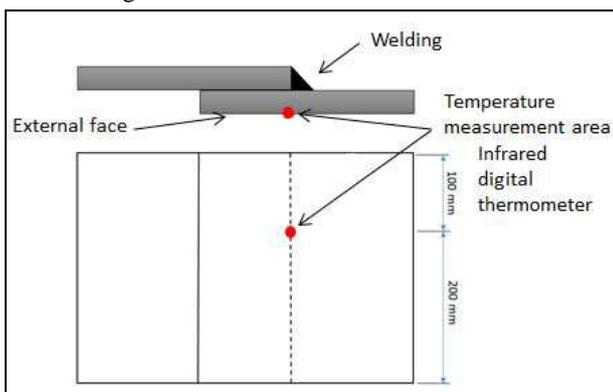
Temperature measurement. Side view and bottom view of plates with overlapping joints.
